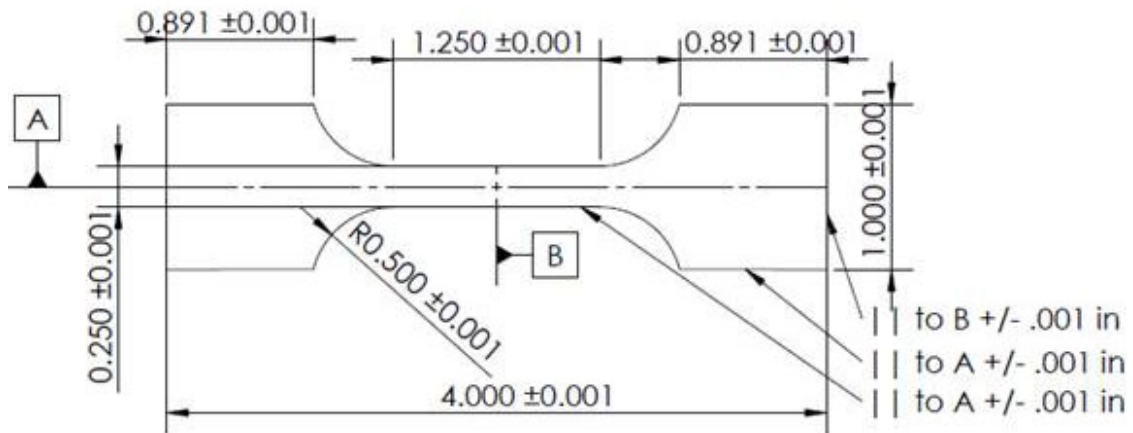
The dimensions of the tensile bar that was machined from the 3 mm plate.
